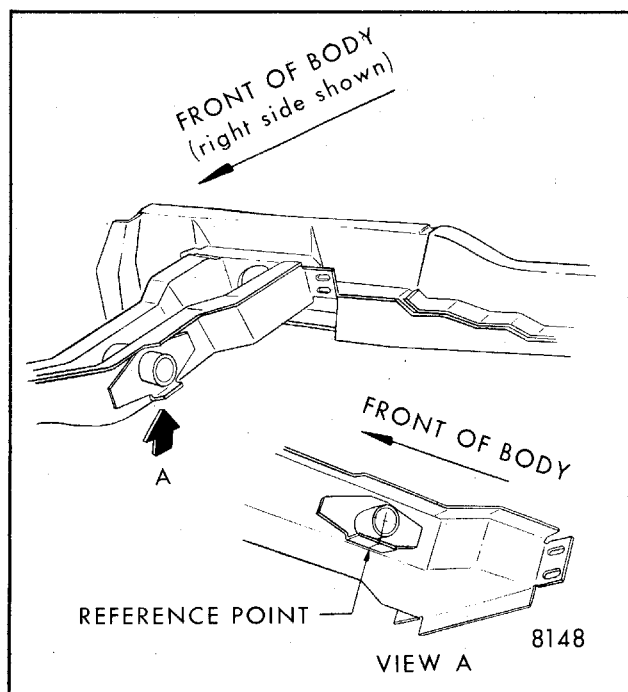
Side Rail at Rear Spring Rear Shackle Bushing - "X" Bodies
